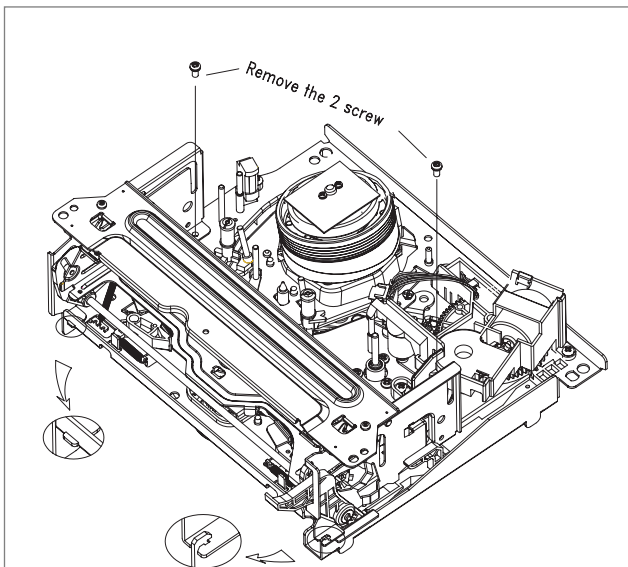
Diassembly of the FRONT LOADING ASS'Y
